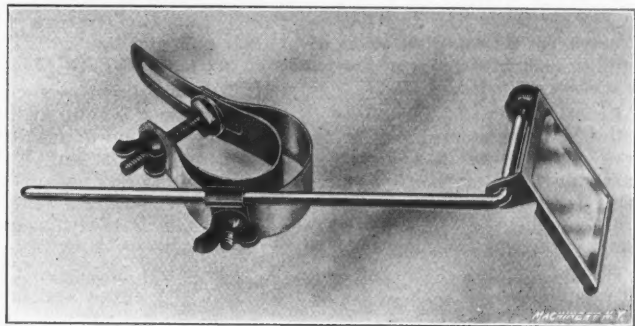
Chip Guard for Protecting the Eyes, manufactured by the Universal Stamping Co.
